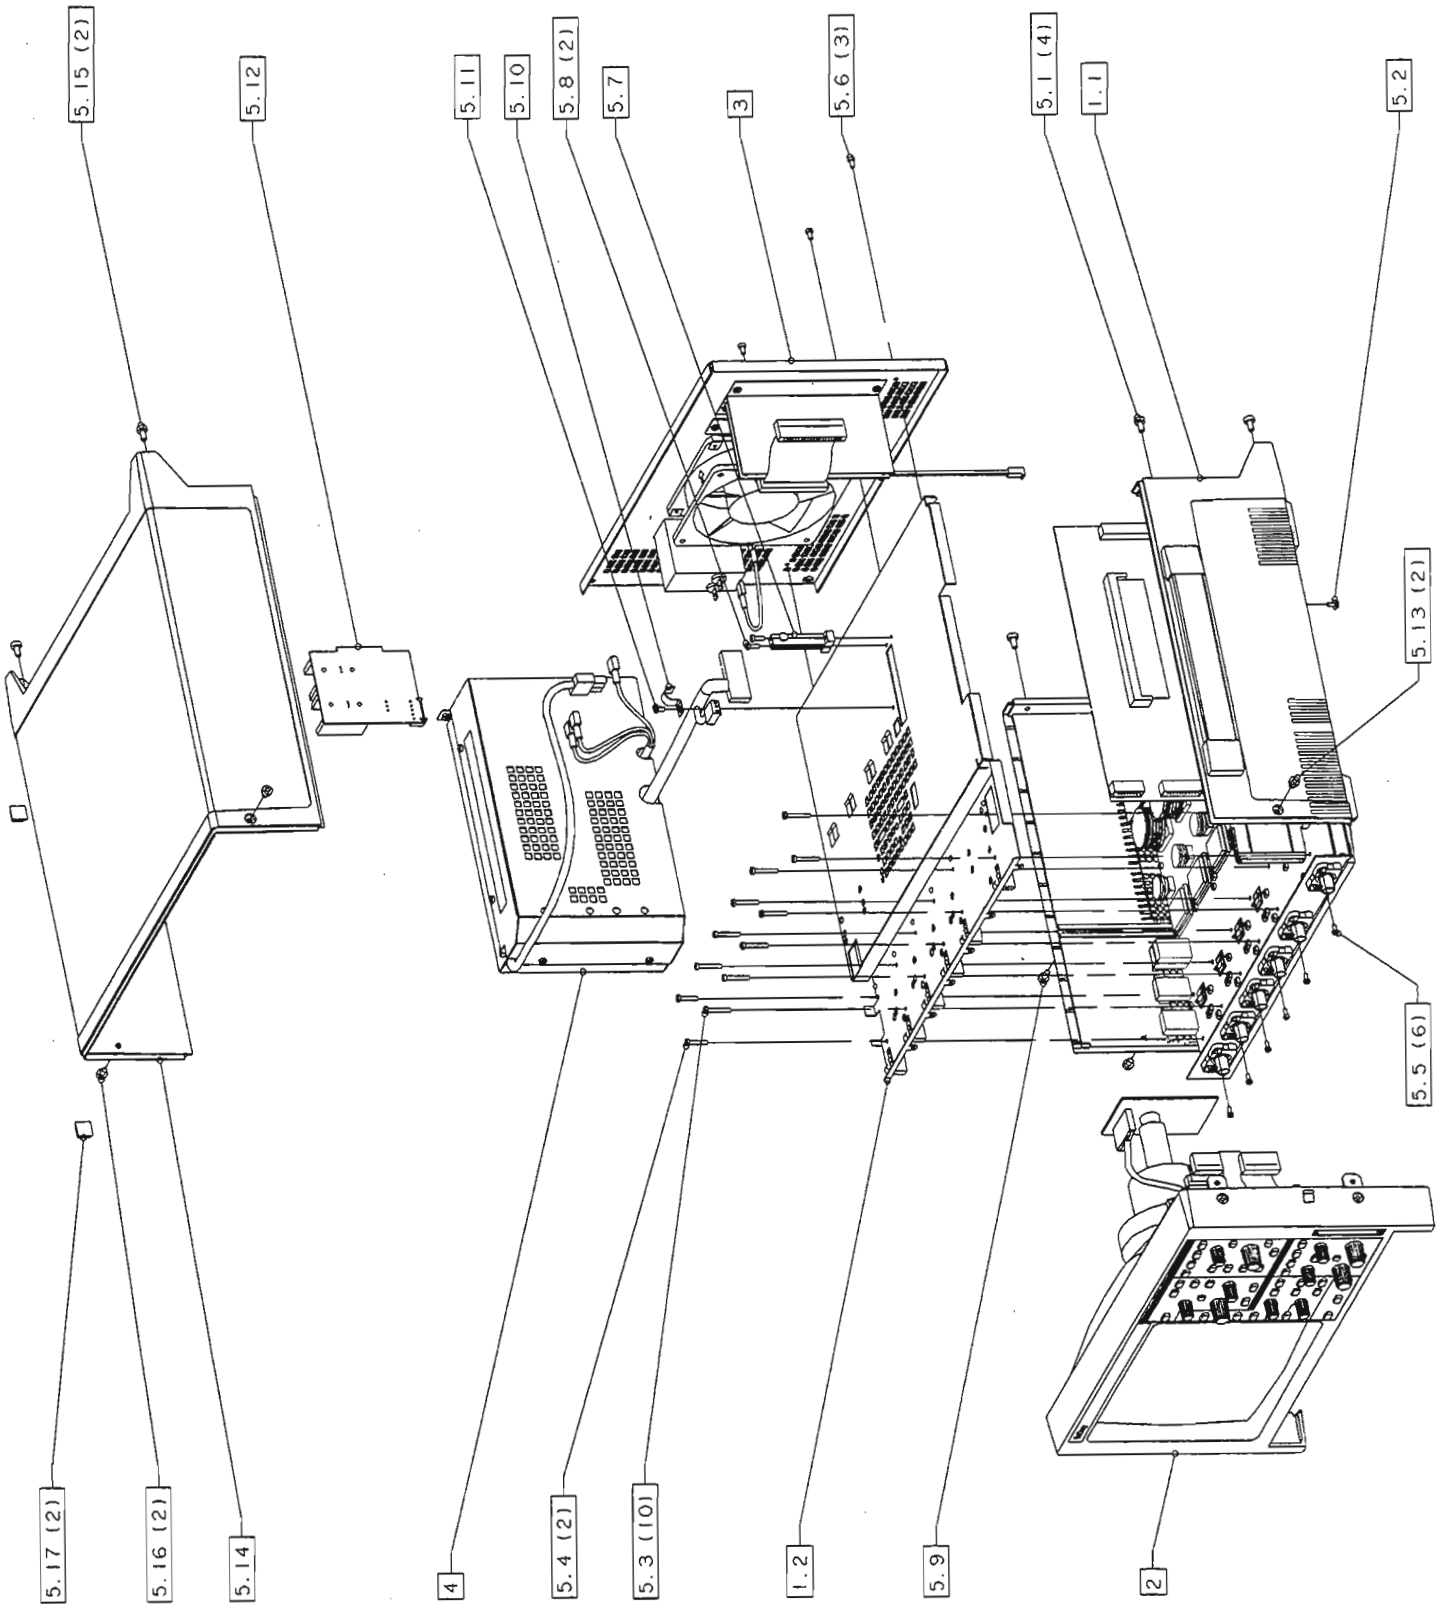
9374/M/L/TM DSO Exploded View
